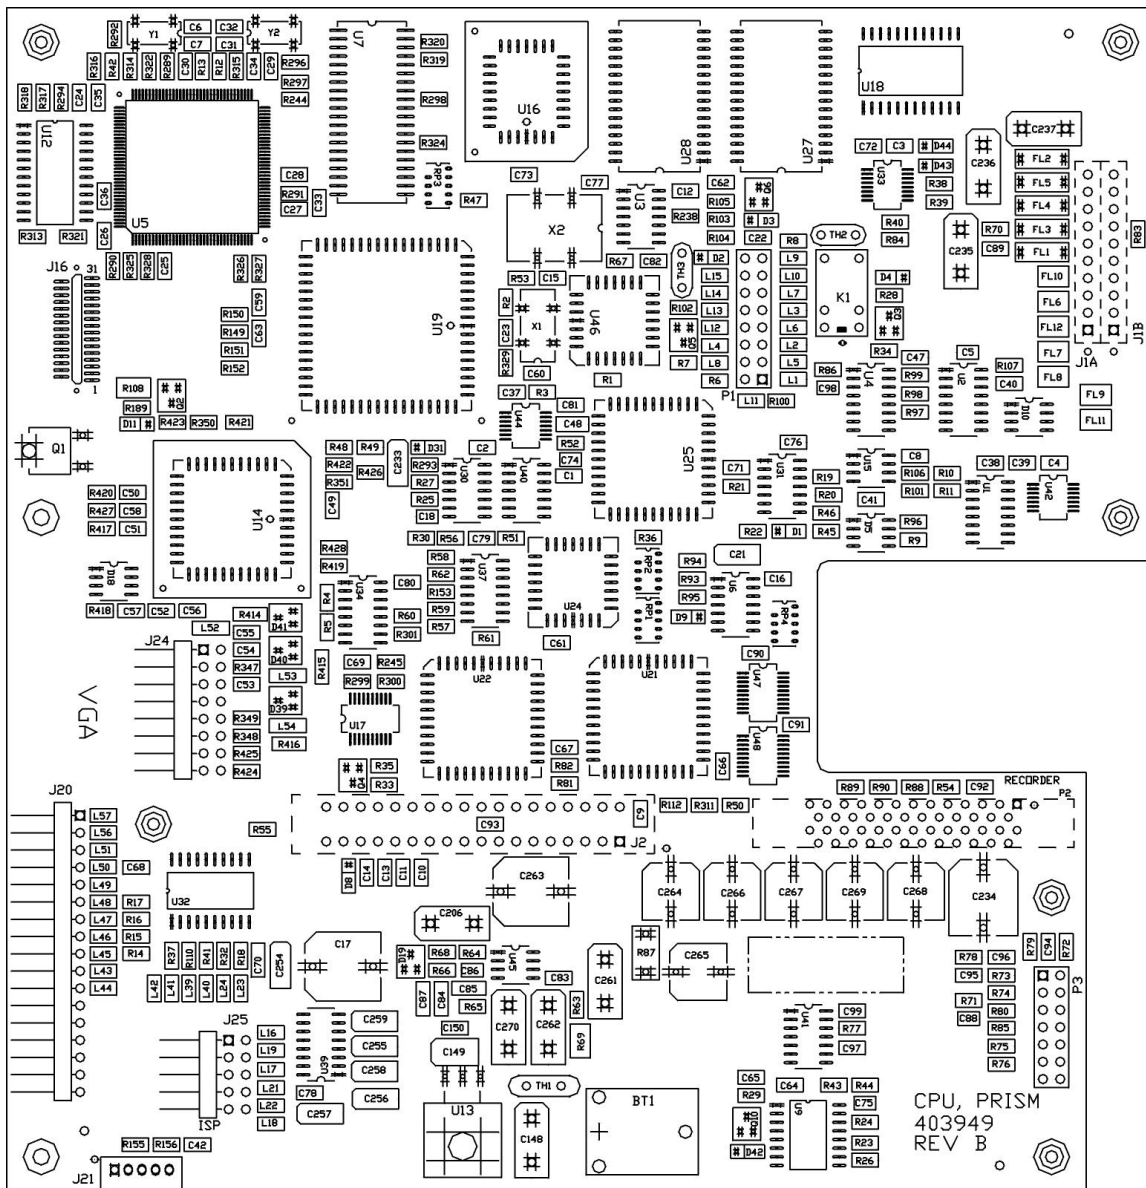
Diagram of PRISM CPU Board Assembly # 403950
